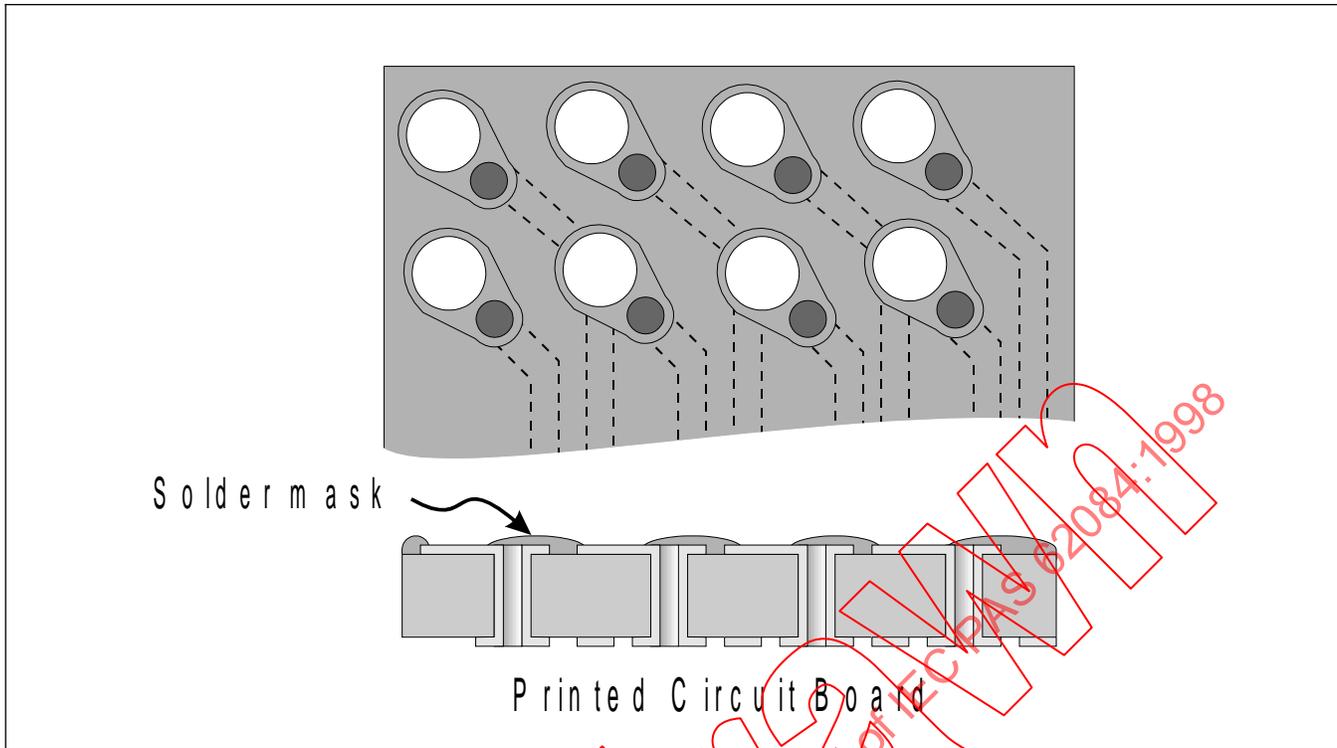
Printed Board Flip Chip or Grid Array Land Patterns
